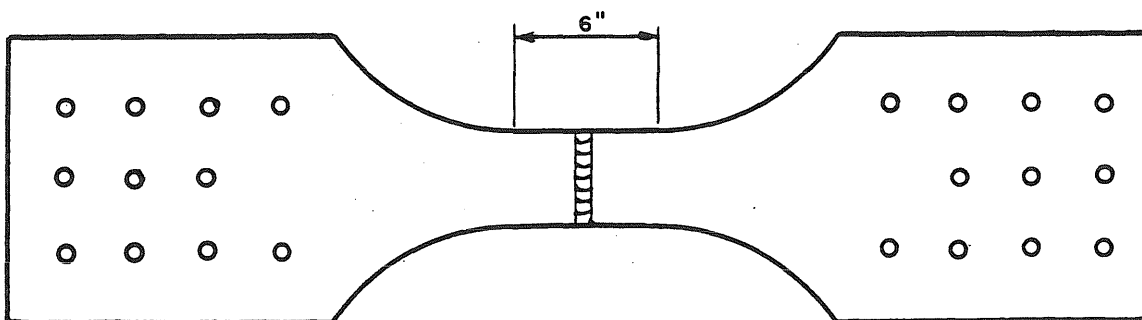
DETAILS OF FILLET-WELDED JOINTS
